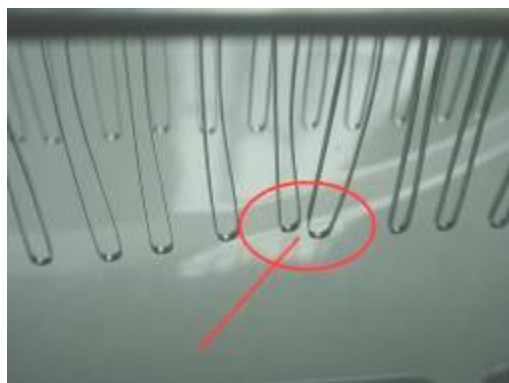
Heating element fixing status: Distance between heating elements not even, distance between some of the heating elements is only 0.8mm.
